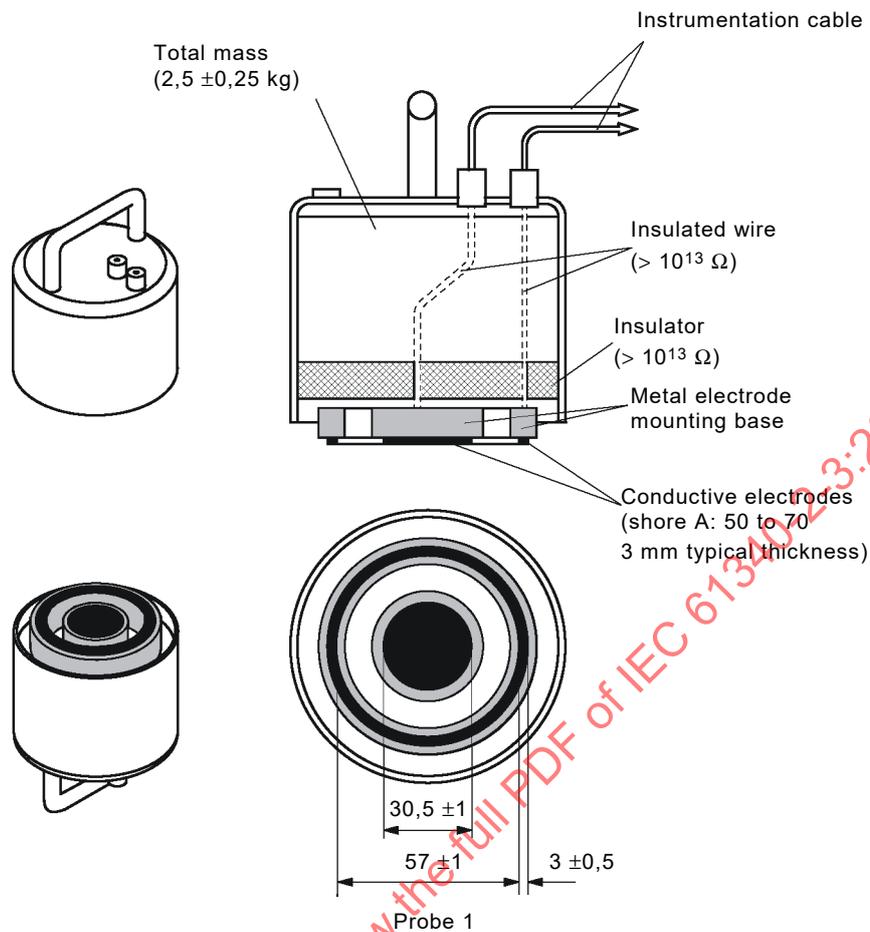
Example of an assembly for the measurement of surface and volume resistance
